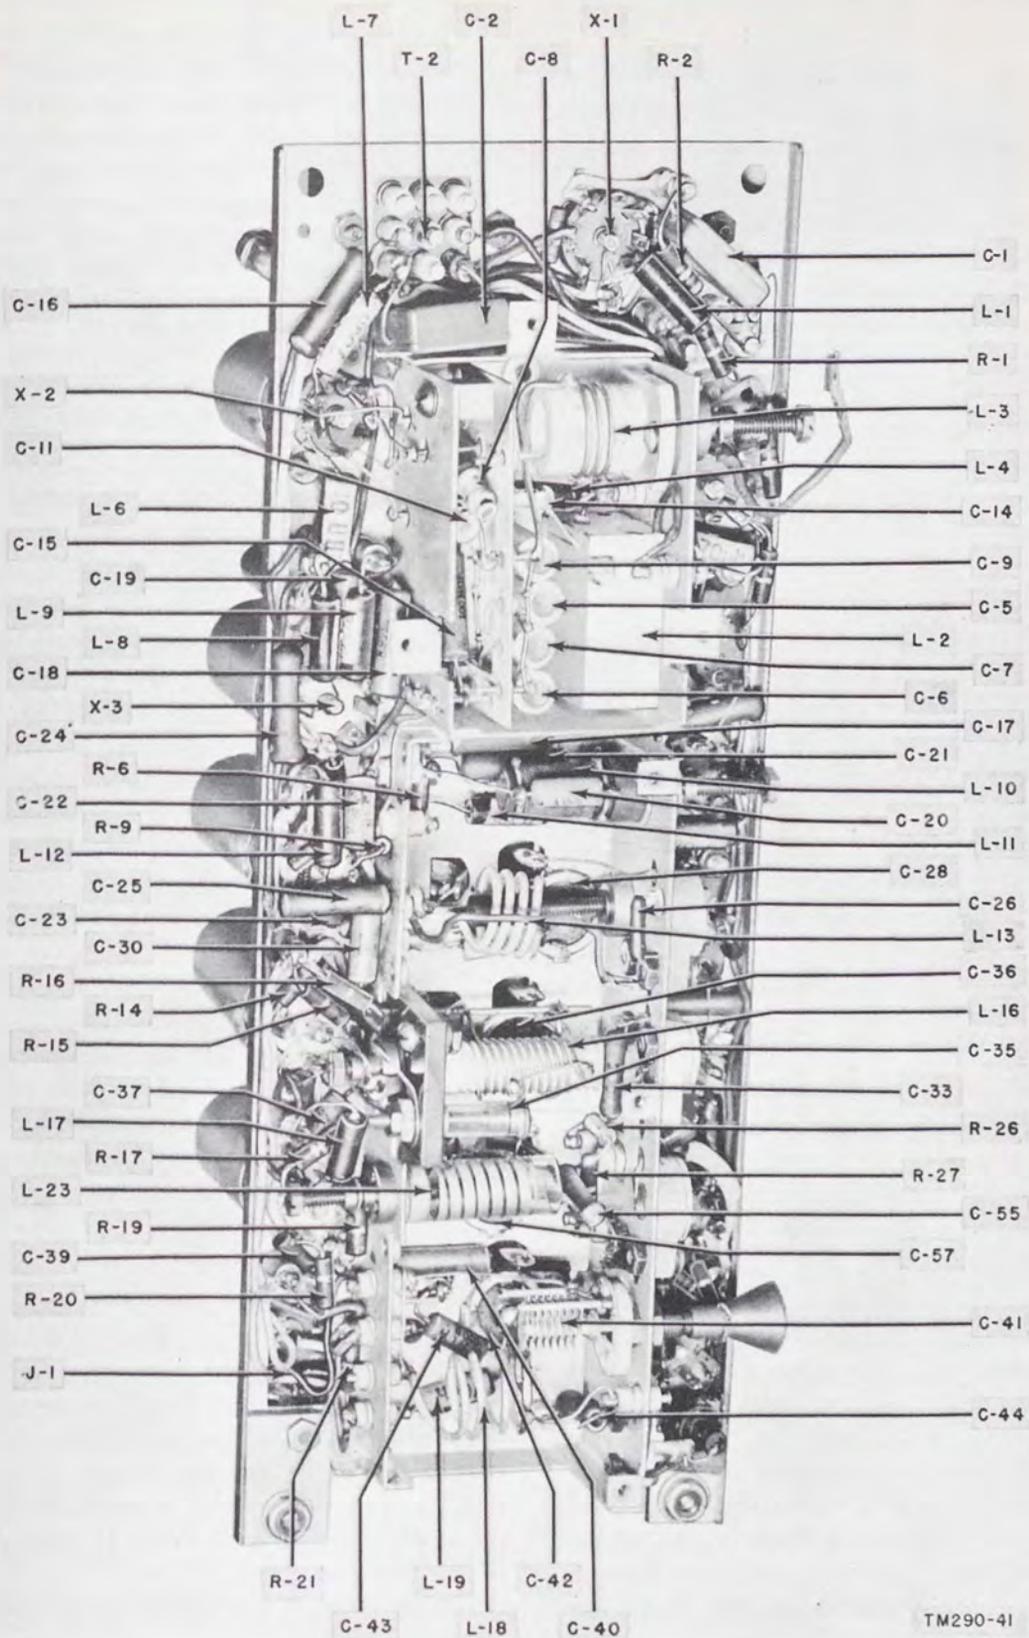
Receiver-Transmitter RT-70/GRC, wiring side of r-f chassis, with coil compartment covers removed.
